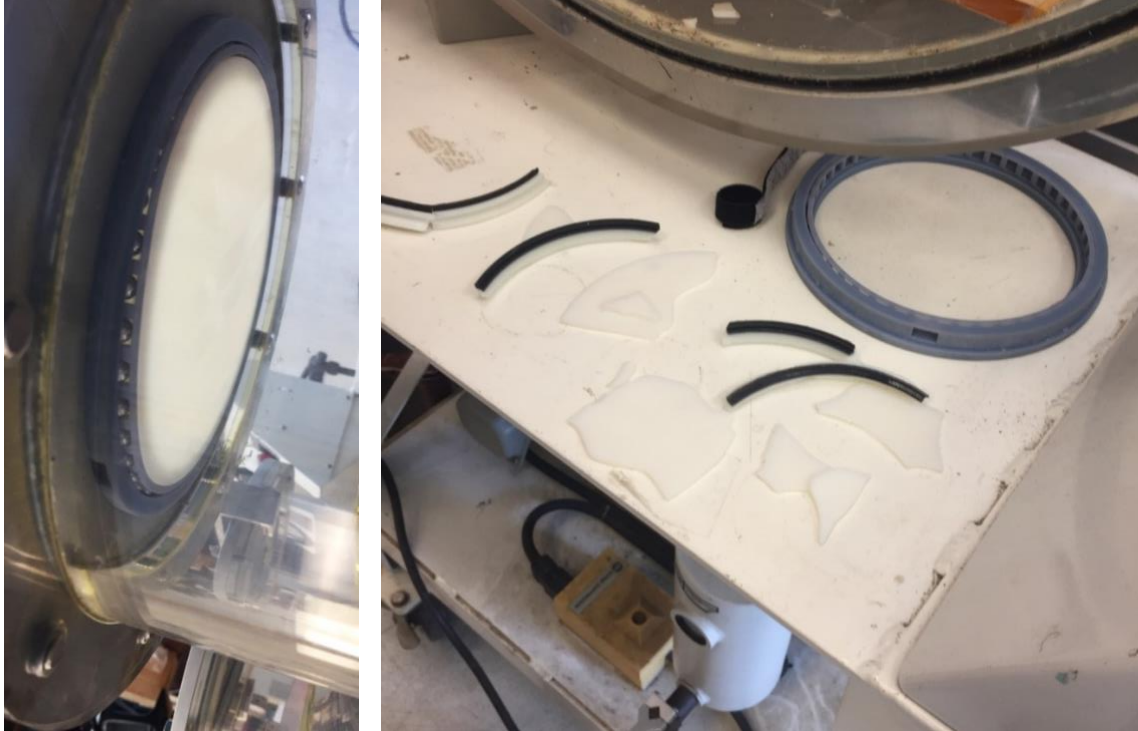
Bearing race began to separate at an angle (left) causing bending forces to act on the inner race. This caused the inner race to fail by breaking in the glovebox (right).
